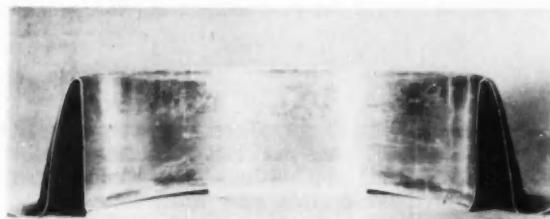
This duct leading edge, formerly two pieces welded together, is now made in one piece by preforming on a stretch press and finish-forming with a drop hammer.
